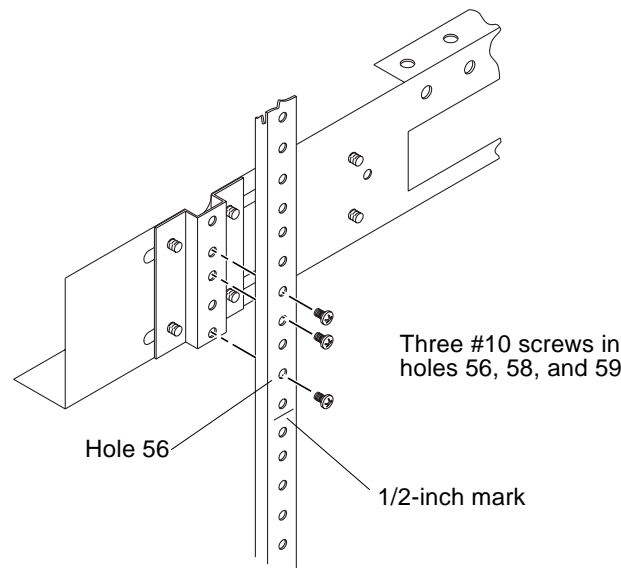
Attaching the Support Rails to the Back of the Cabinet
